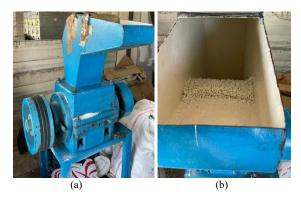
Shredding and grinding machinery of defective soles and leftovers
